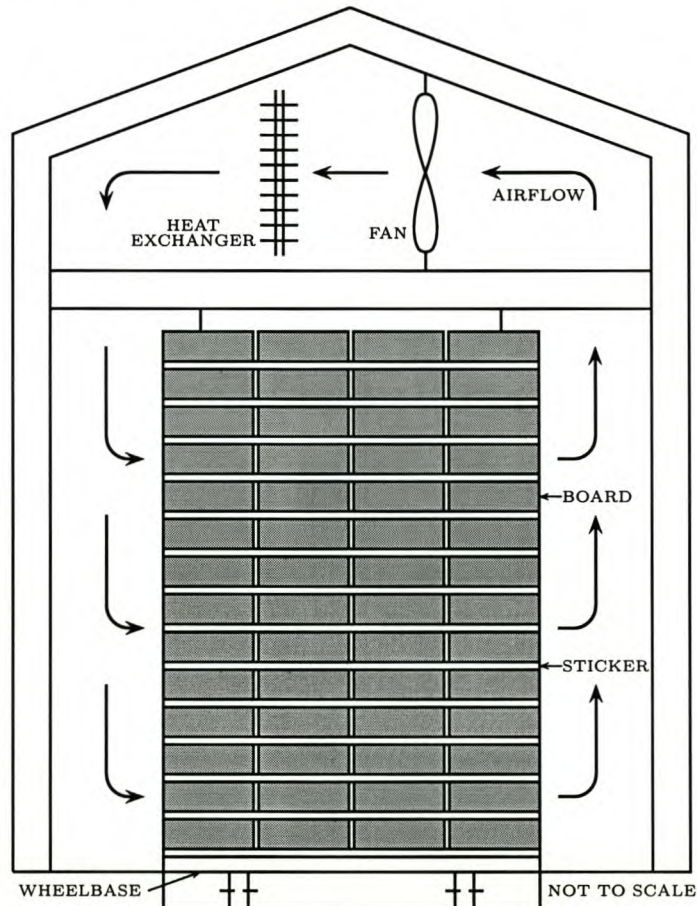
A section through a typical timber-drying kiln with stack in the centre.
